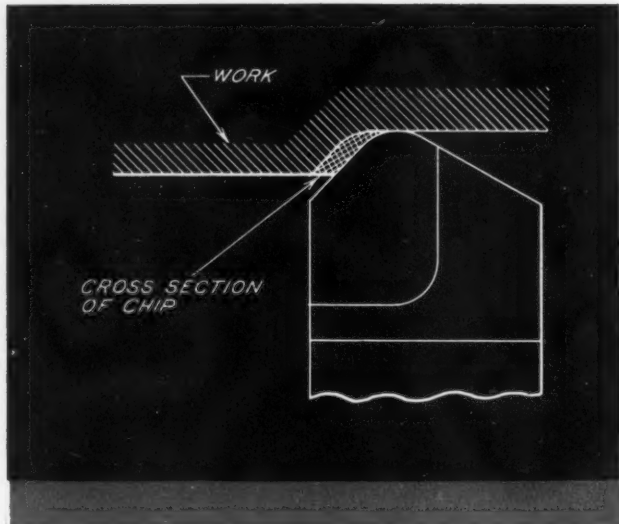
Diagram which Shows the Cross-section of Steel Chip Produced by a Tool with Too Large a Nose Radius in Proportion to the Depth of Cut and Feed
